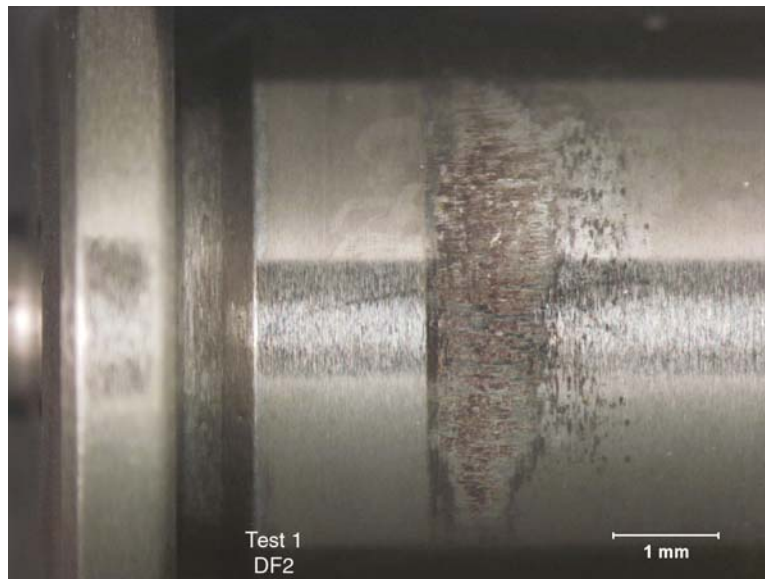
AF7469 ULSD, Lower Hydraulic Coupler Piston, Wear Scar Close Up
